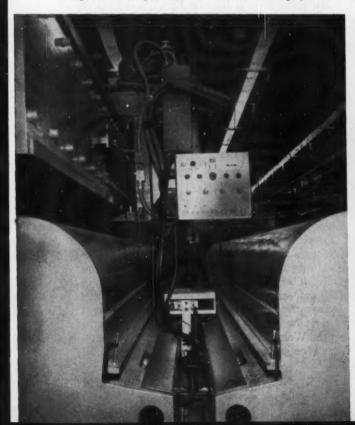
Planishing machine which rolls down welds to a smoothness comparable to that of a continuous sheet.
